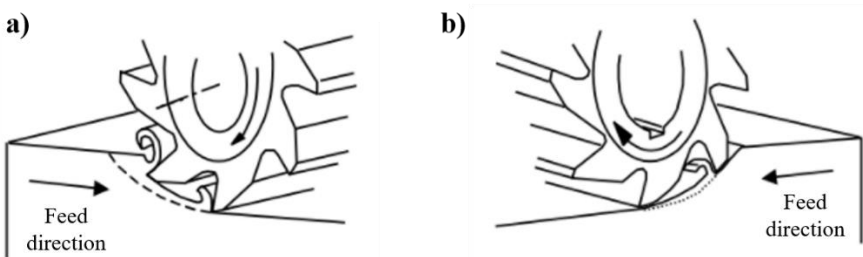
Tangential milling: a) Up milling; b) Down milling [15]
